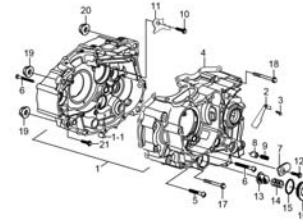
CRANKCASE COVER (P05-S040-0048)
